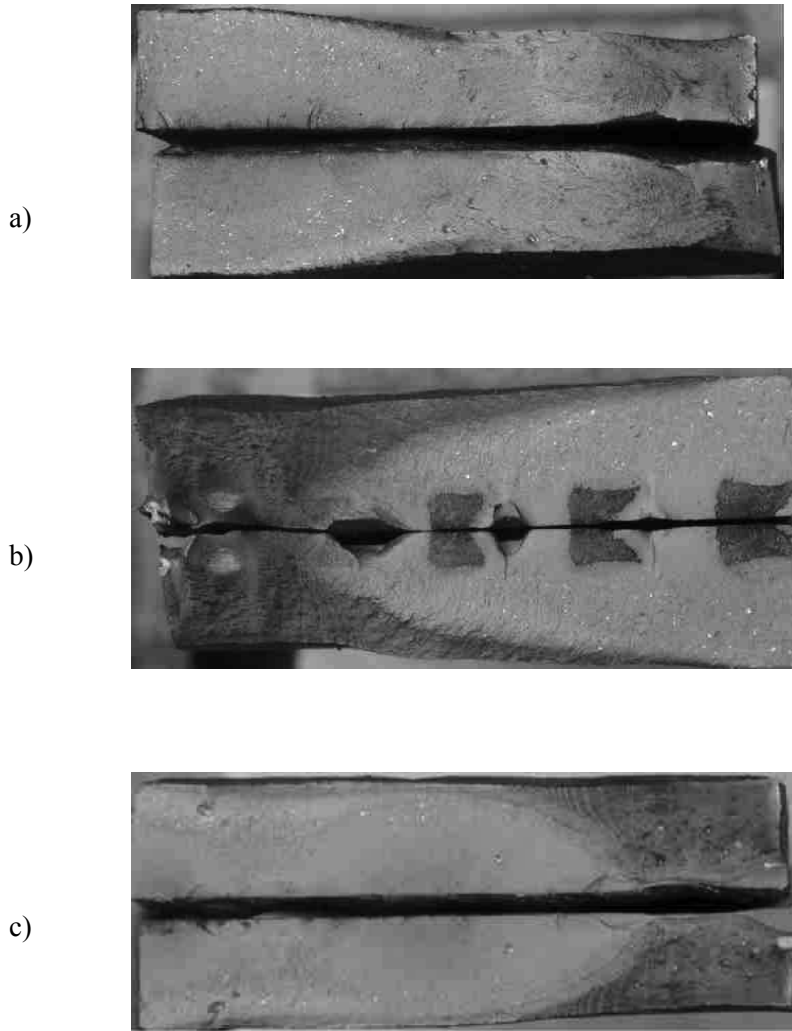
Surfaces of fatigue cracks in welds under moving seams
